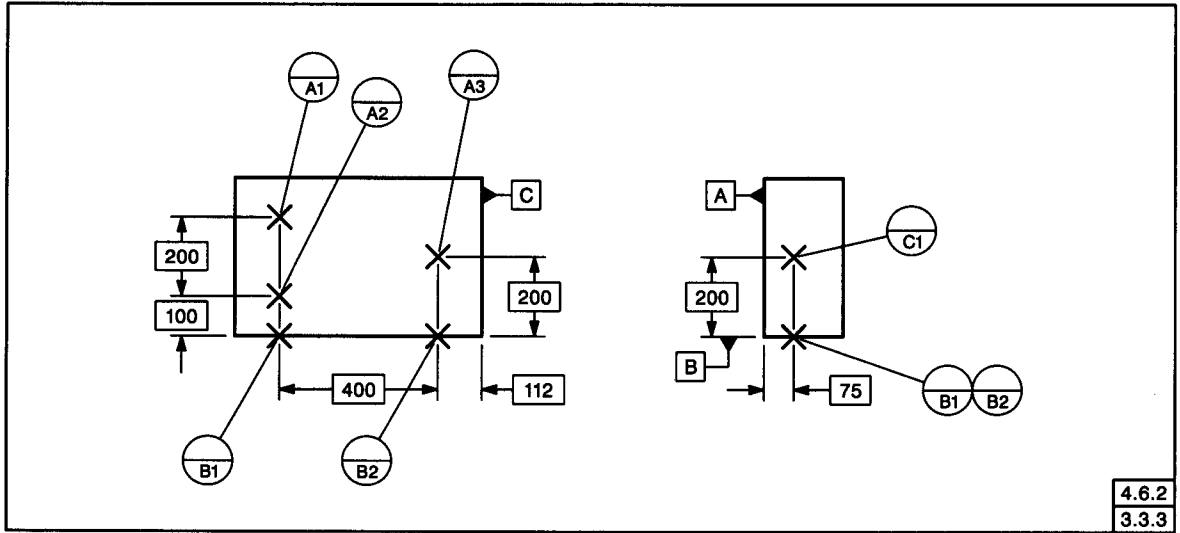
DIMENSIONING DATUM TARGETS
